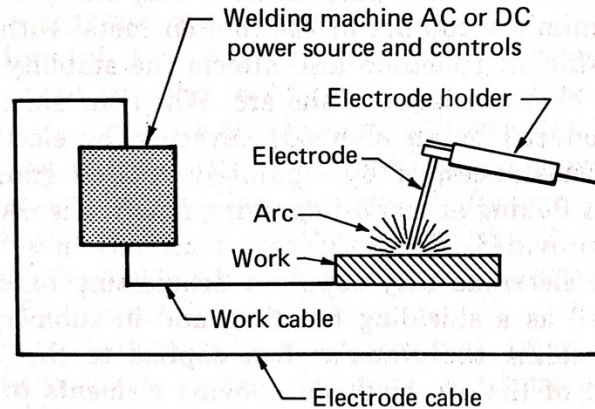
Basic arc-welding circuit (Source: The James F. Lincoln Arc Welding Foundation, P. 1.3-1)
